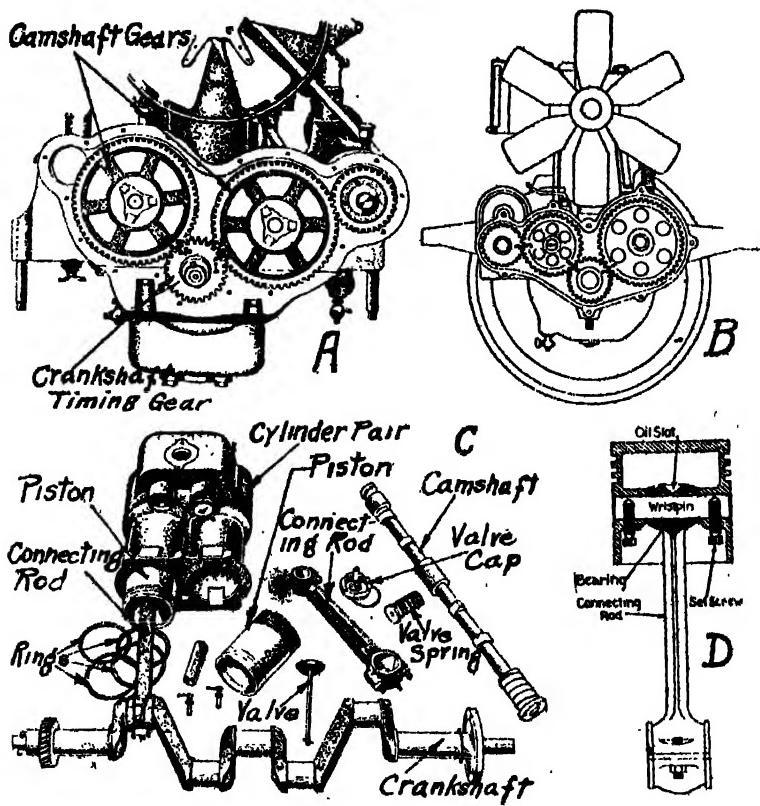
Showing Method of Marking Timing Gears and Group of Miscellaneous Motor Parts.
